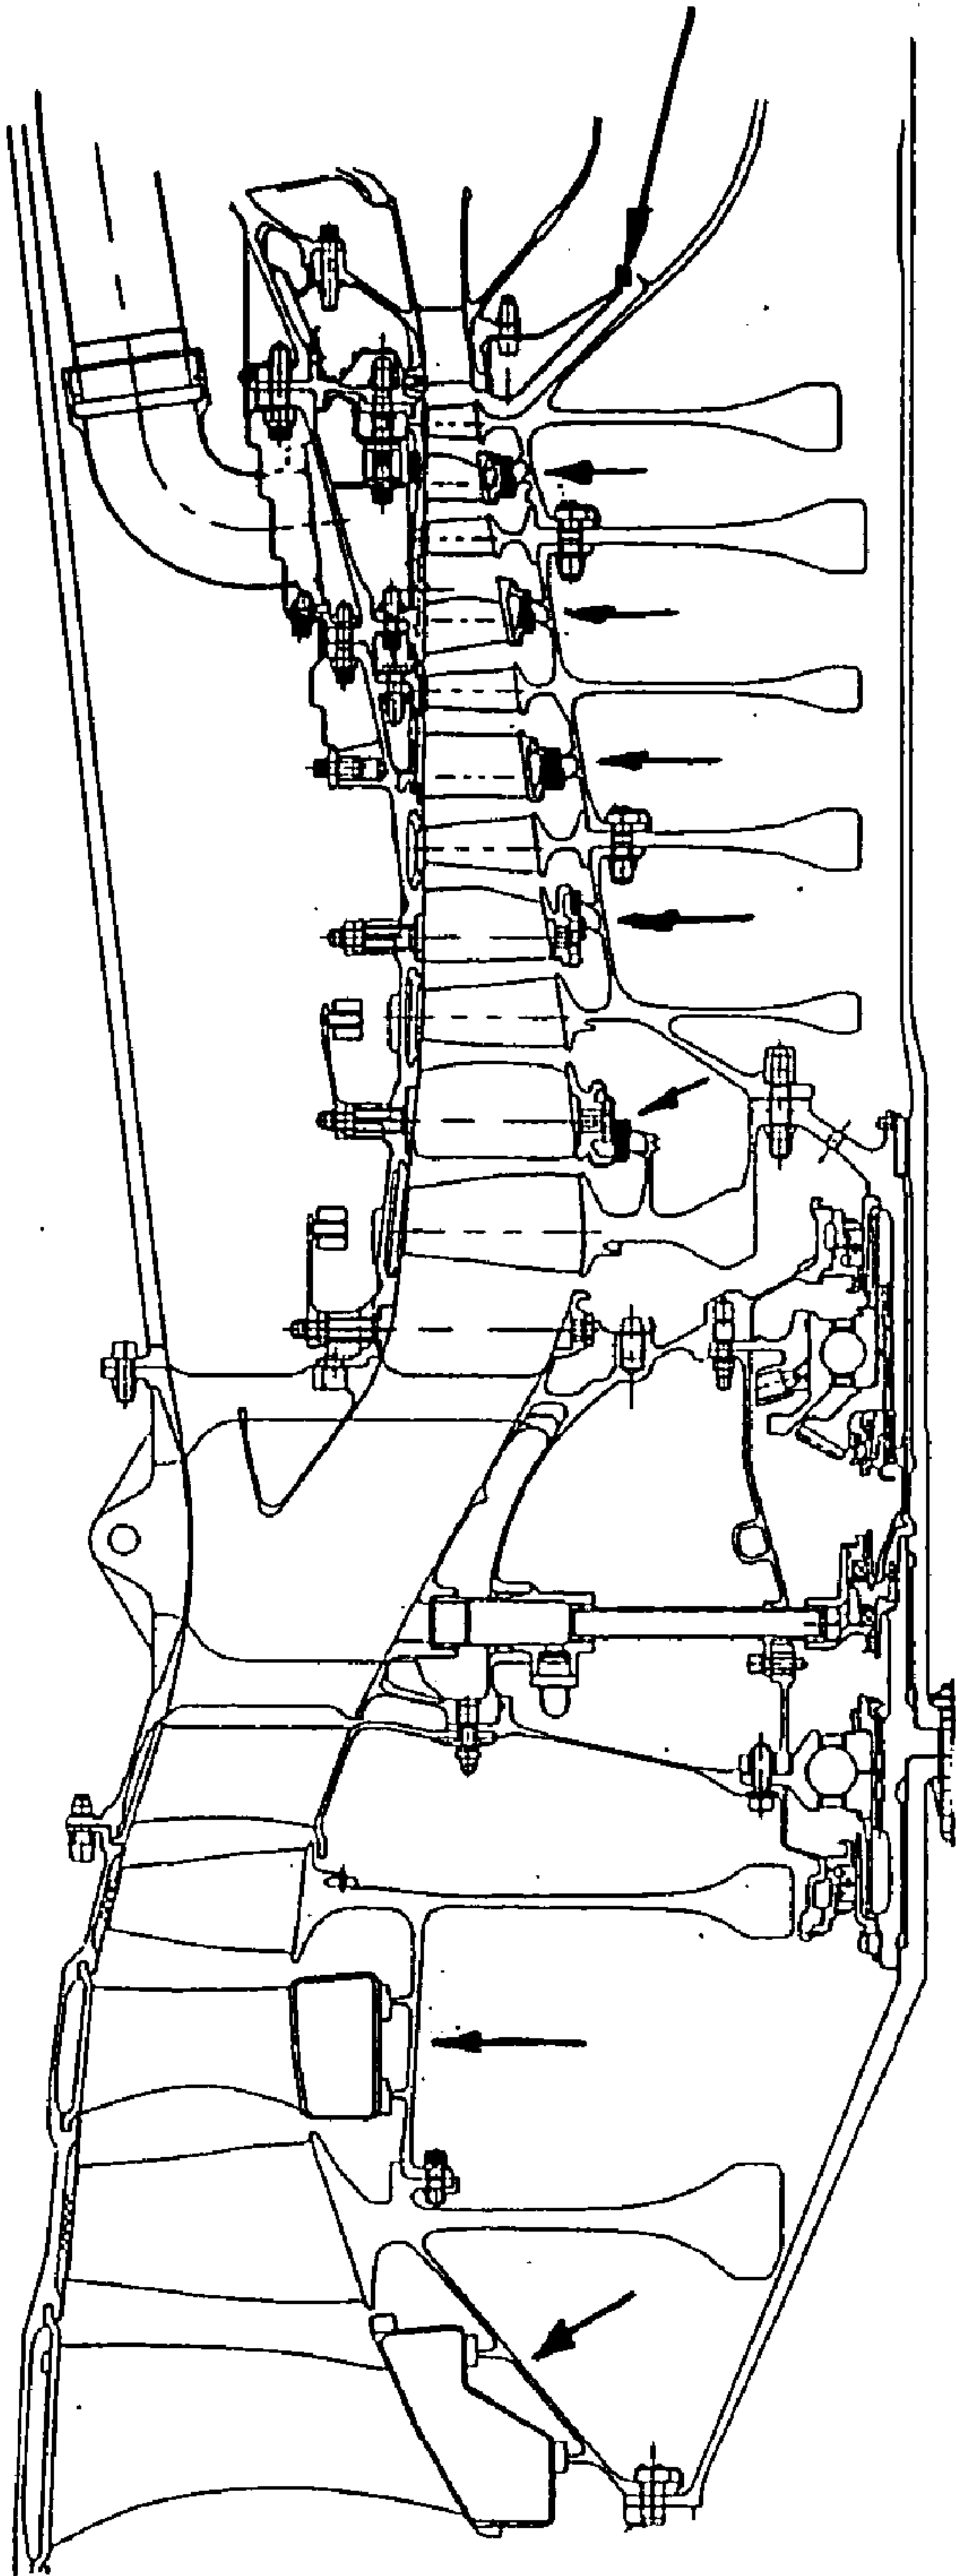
A – Gas Turbine Engine Critical Seal Locations indicated by arrows
